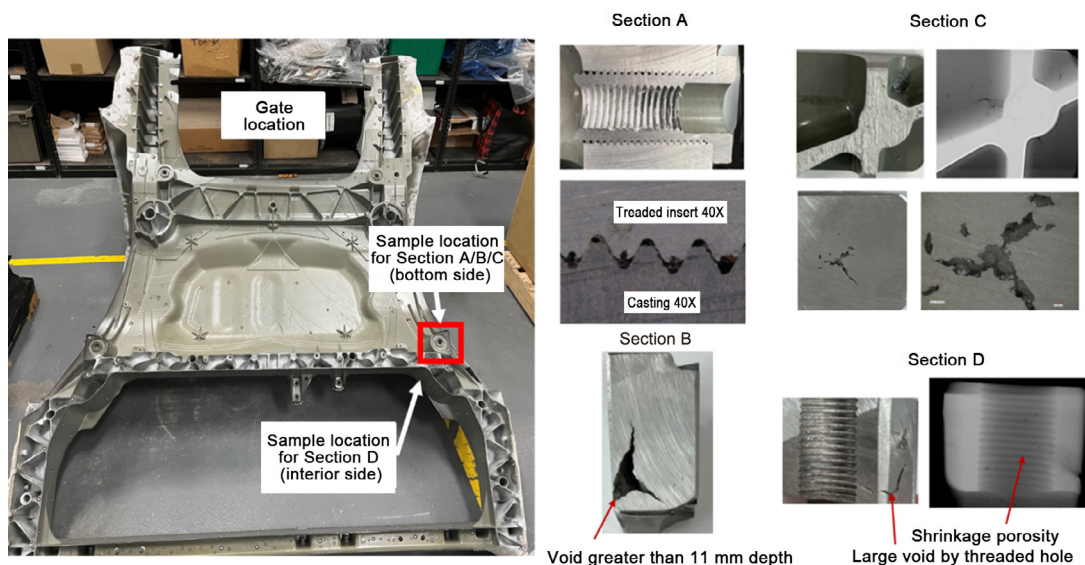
Large macro shrinkage porosity observed in a giga aluminum casting
